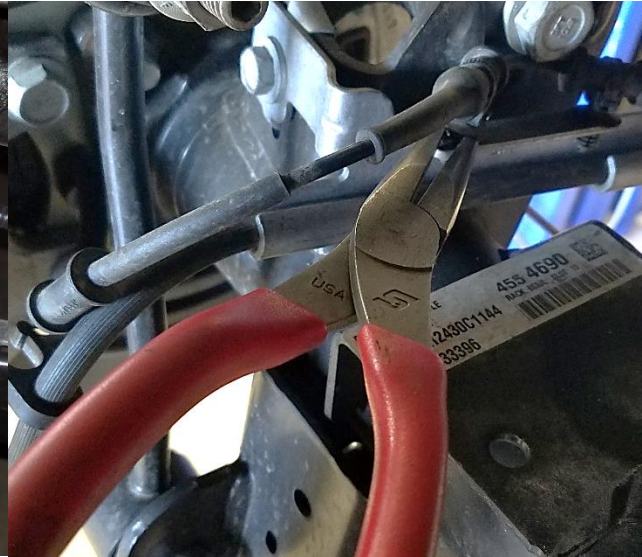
Front ABS Wire Mount Removal Figure 2. Rear ABS Wire Mount Removal
